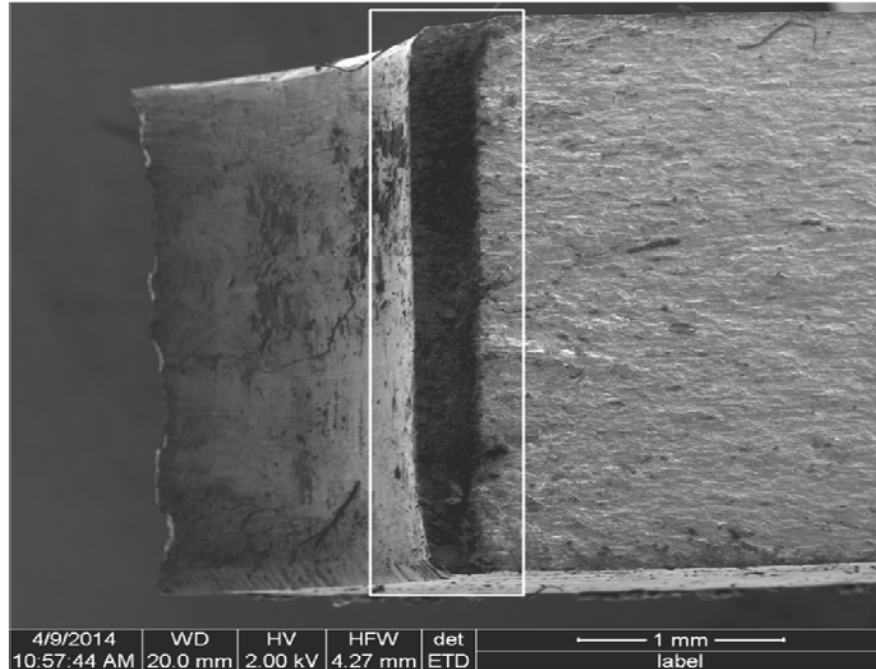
Top view of a through pit in air after the specimen was cut into two halves along the fatigue crack (4.27mm HFW).
